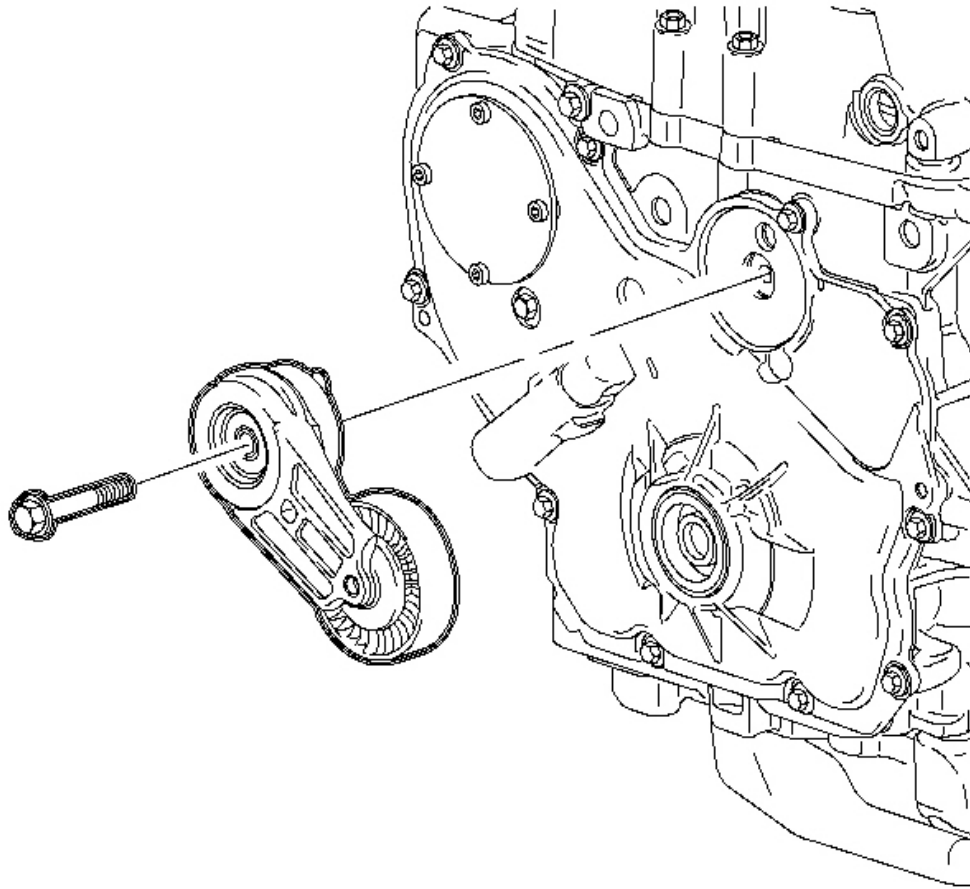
Removing/Installing Tensioner Assembly & Bolt
